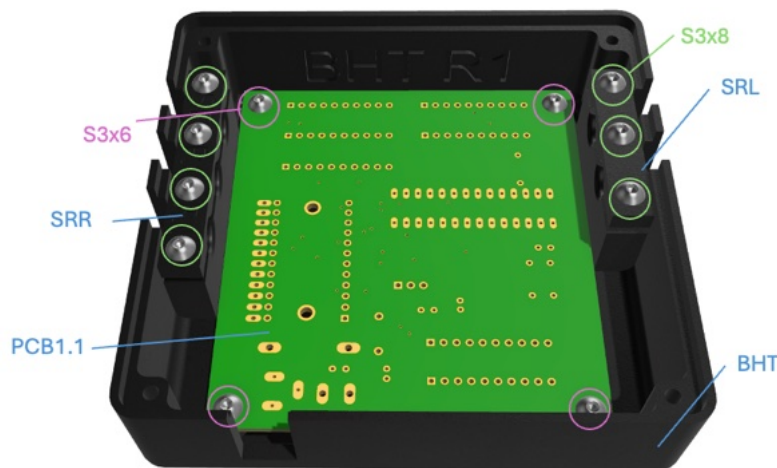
Main circuit board V1.0/2.0 housing "free-standing" assembly step 1.
